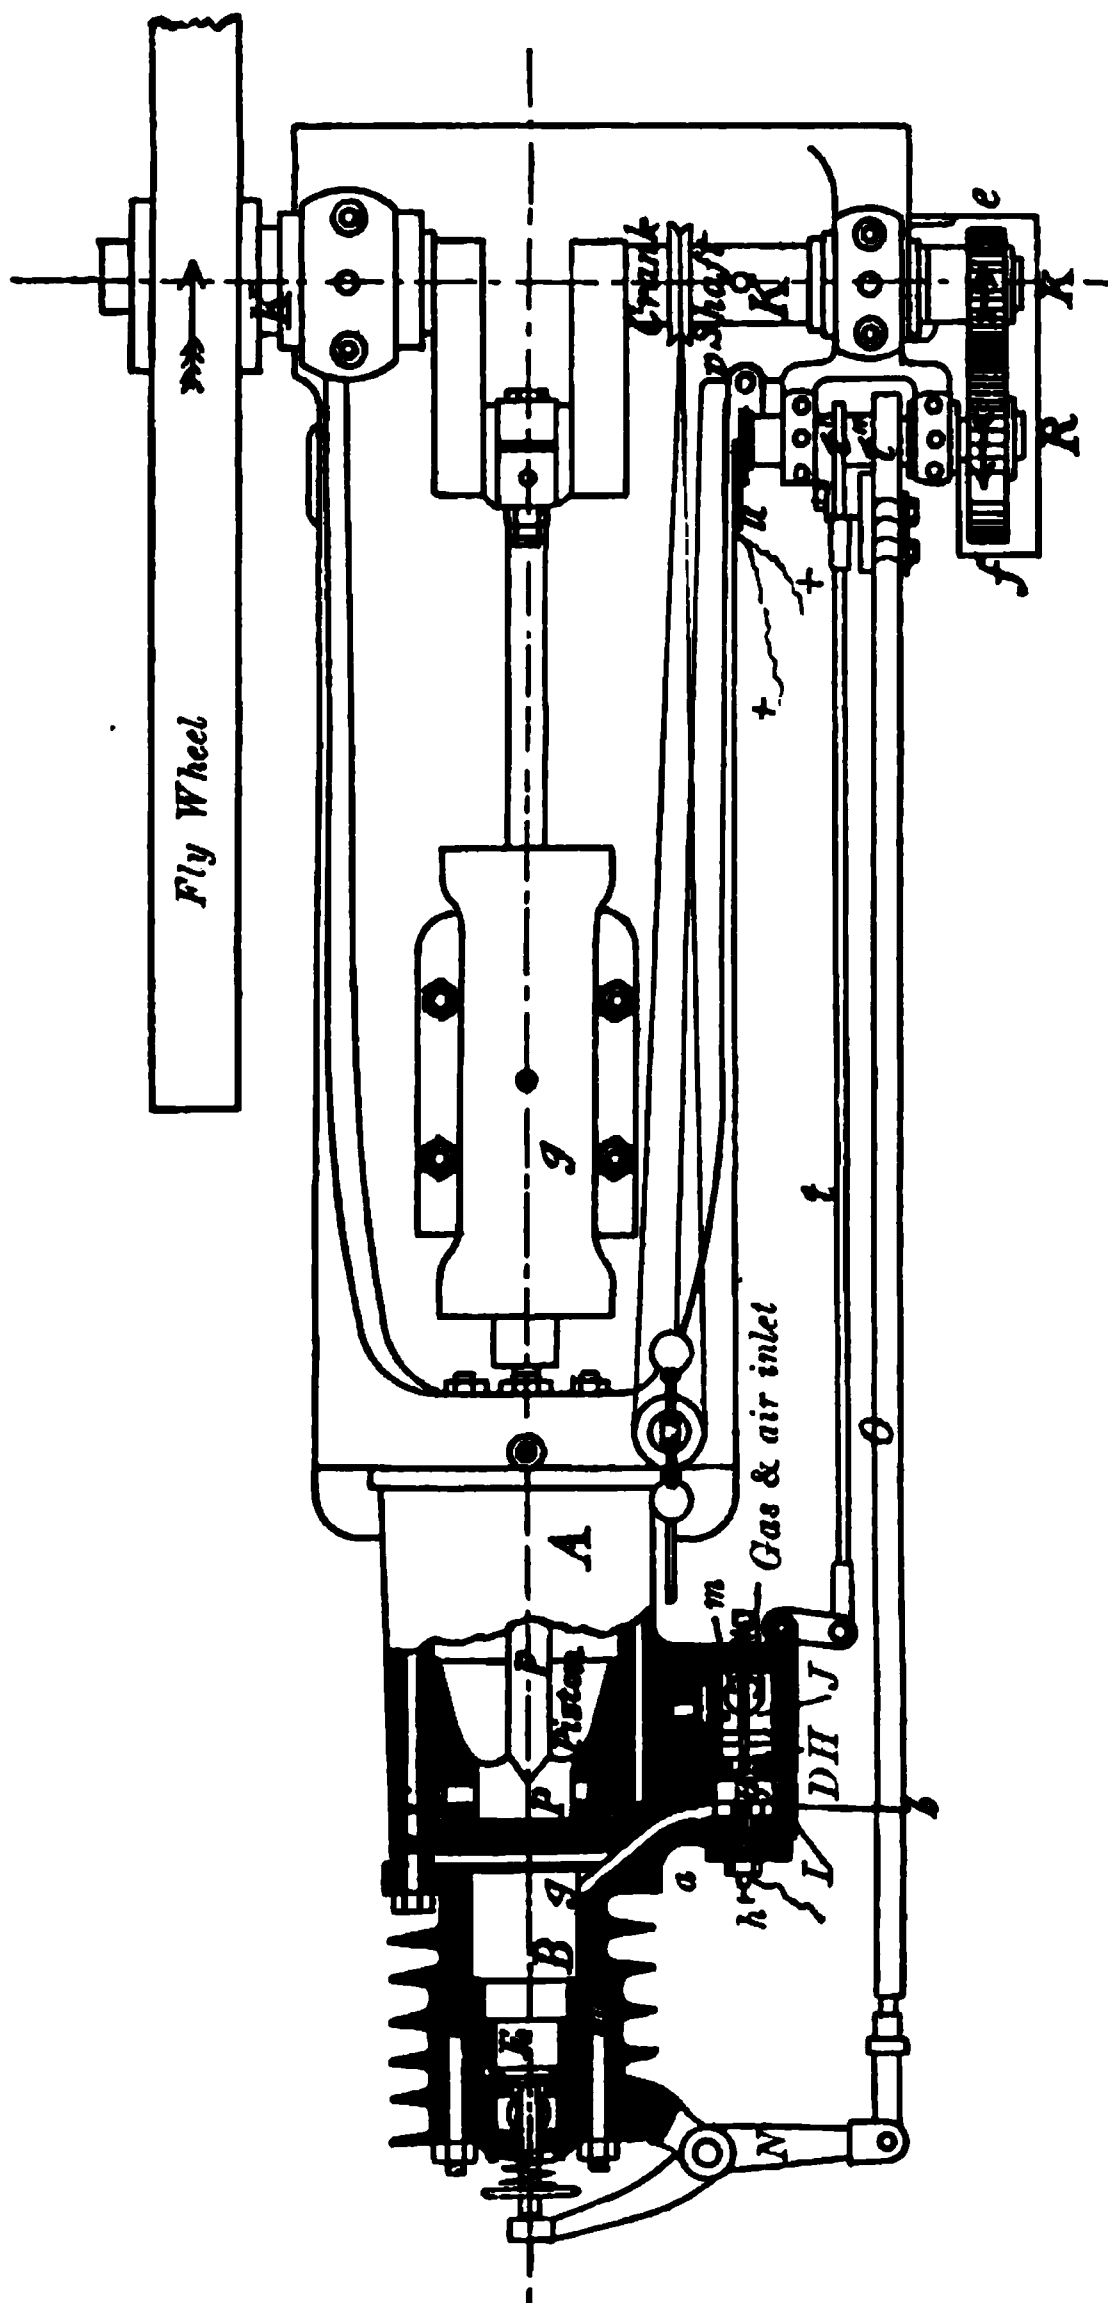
Second Lenoir Gas Engine—Sectional Plan.
